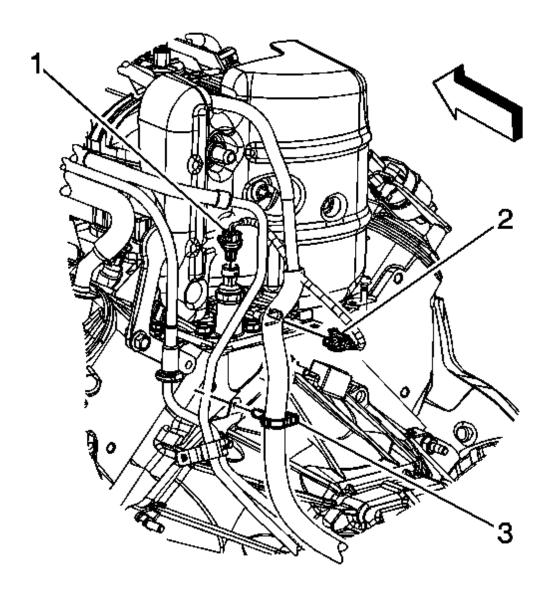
View Of Engine Harness Electrical Connectors & Inlet Hose Clamp Courtesy of GENERAL MOTORS CORP.
